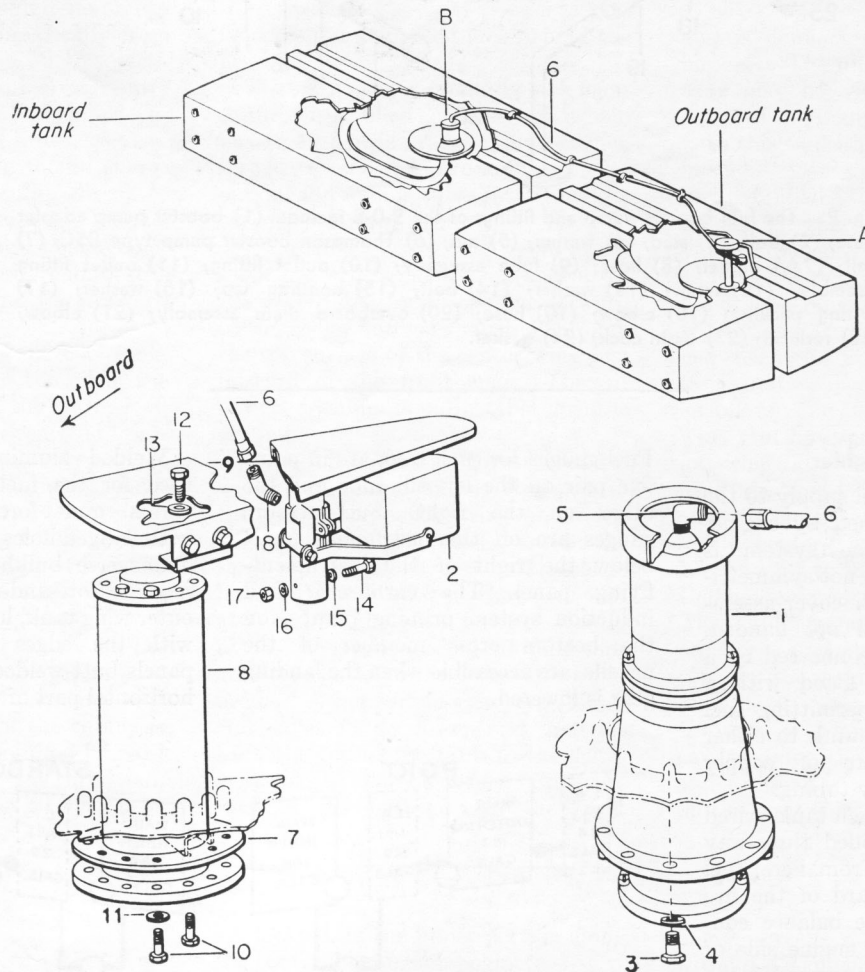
The Martin 2-0-2 fueling and defueling valve installations shown include the following parts: (1) valve assembly; (2) float assembly; (3) bolt; (4) washer; (5) elbow connection; (6) Aeroquip hose assembly; (7) gasket; (8) surge valve assembly; (9) cover assembly; (10) bolt; (11) washer; (12) bolt; (13) washer; (14) bolt; (15) washer; (16) washer; (17) nut; (18) nipple.
